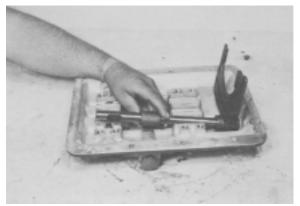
Remove 1st & Reverse shift fork, rail and lug assembly.
